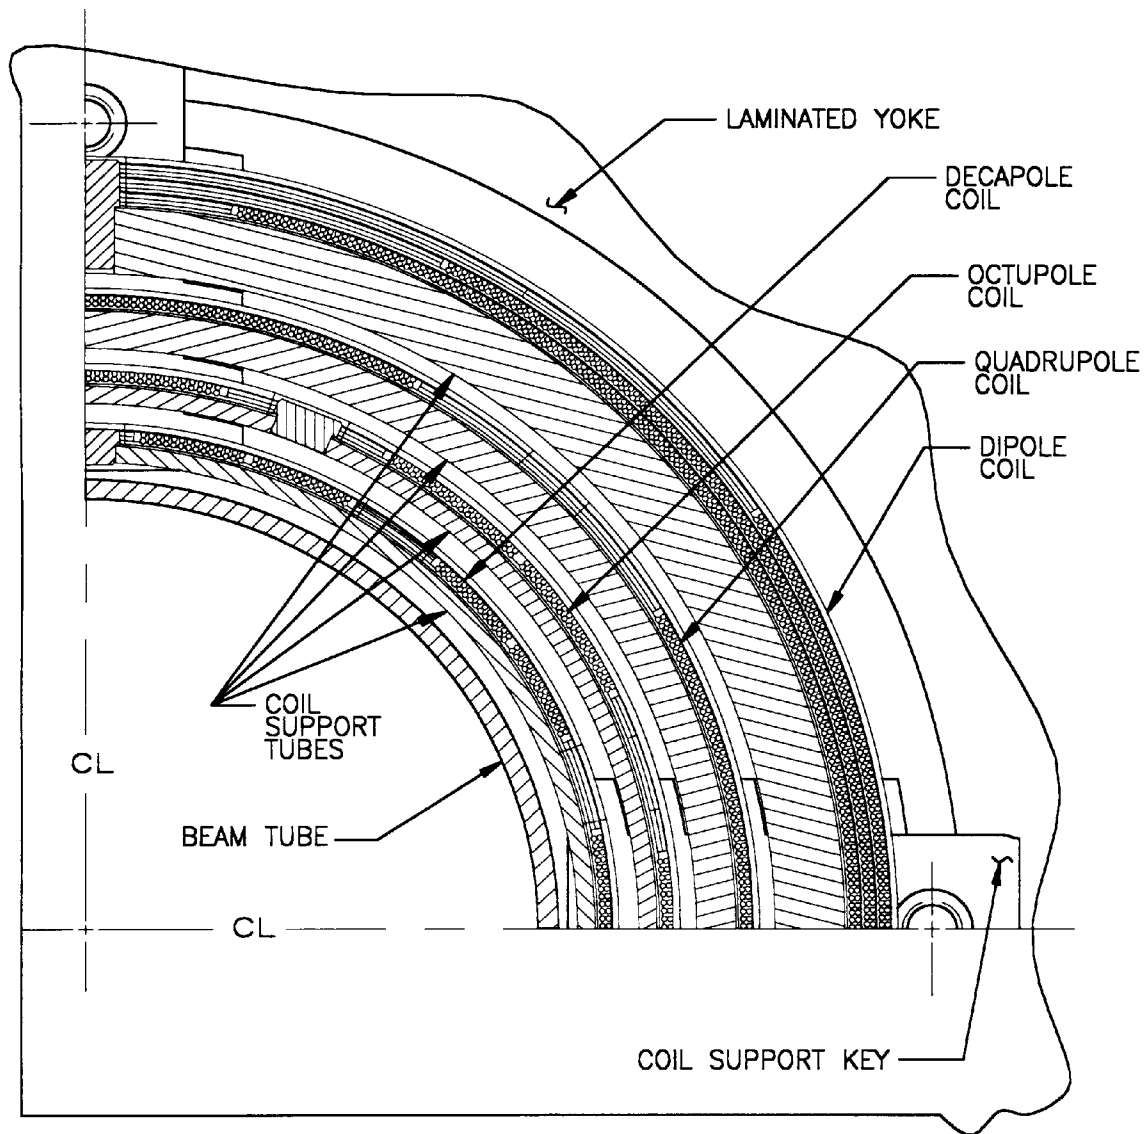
Arc corrector coil cross-section (beam tube i.d. = 69 mm).
